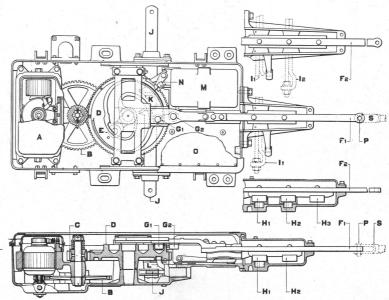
Model 4 Switch Machine Showing single and double locking cages.
